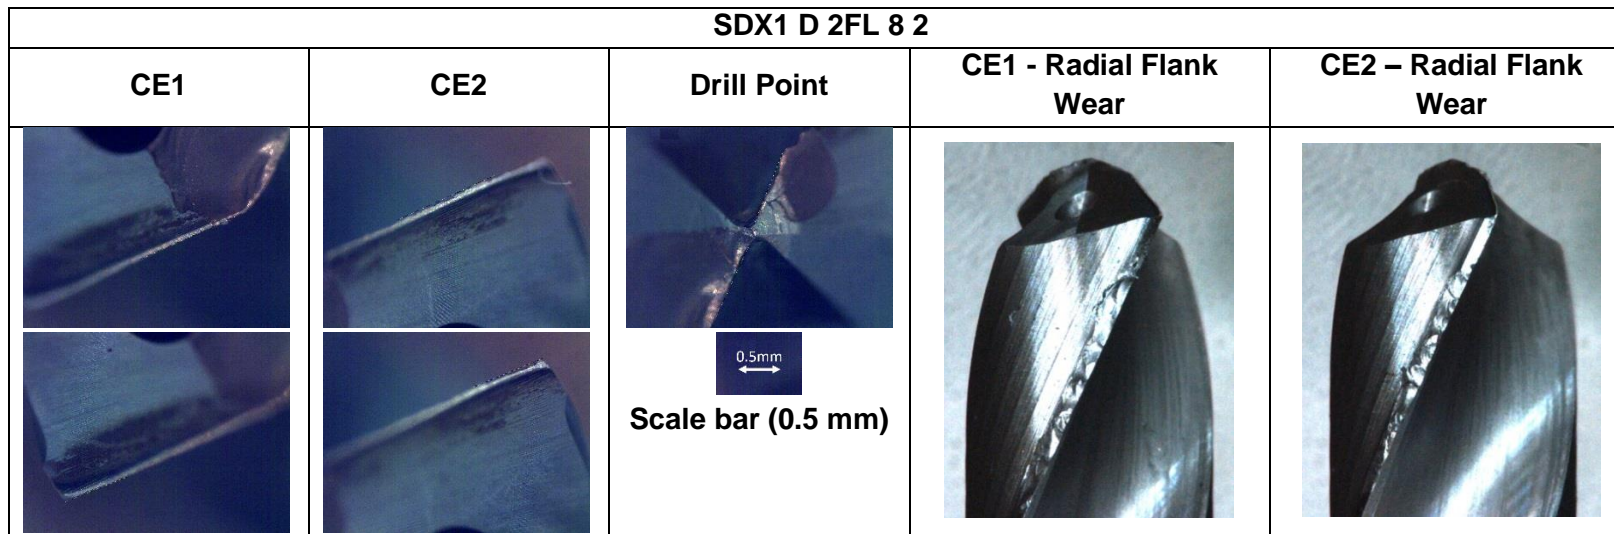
Flank wear on the cutting edges and severe radial flank wear on the margin
